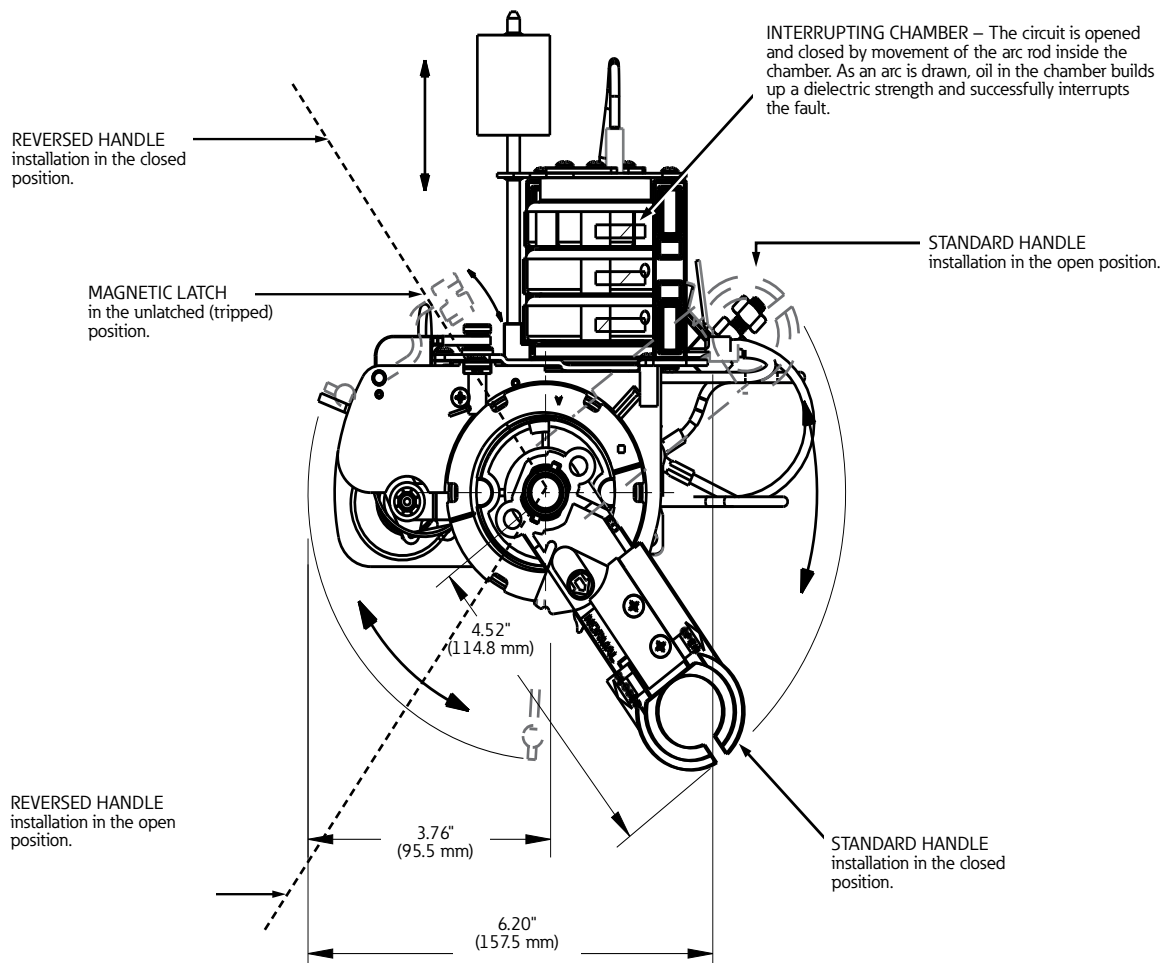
MagneX Interrupter showing handle swing – Front View with Standard Handle.
